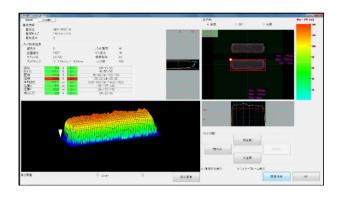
Example of the Inspection Using an Automatic Solder Visual Inspection System
